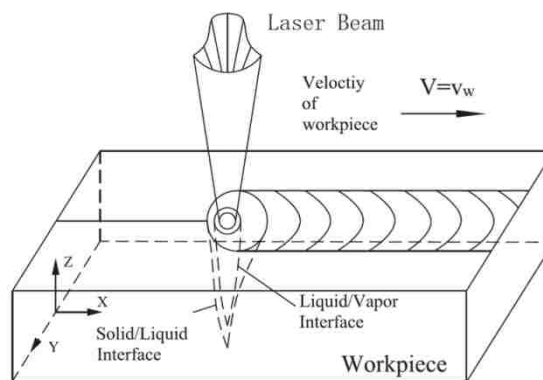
Schematic presentation of laser welding process [18]
